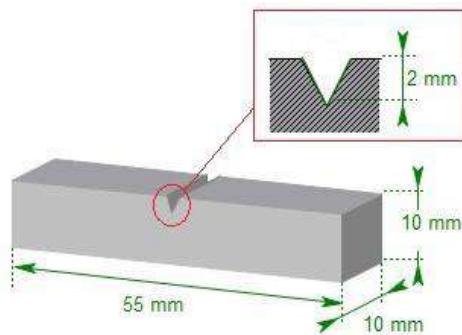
Standard Sample Dimensions of Charpy Impact Test
